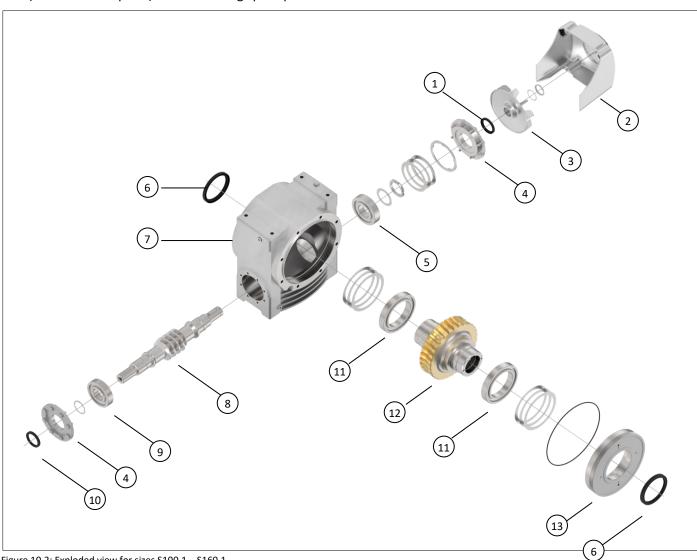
Exploded view for sizes S100.1 – S160.1
